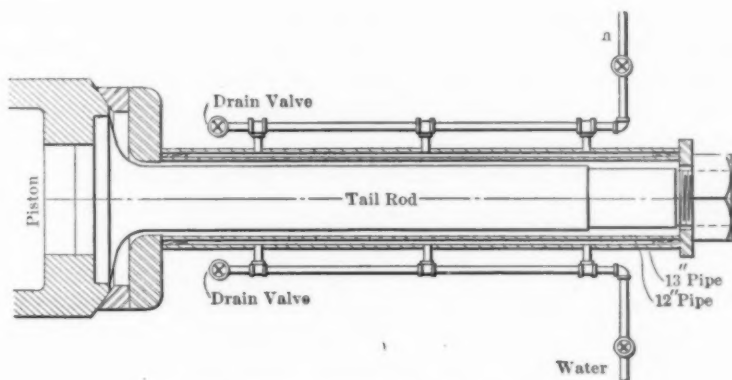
DEVICE FOR STRIPPING TAIL RODS
